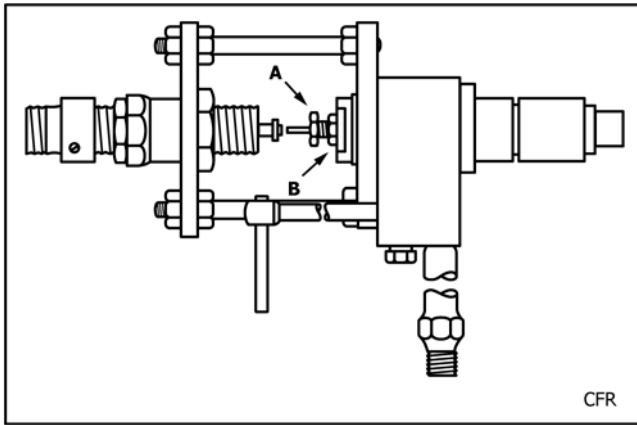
Injector Assembly Showing Pickup Mounted
